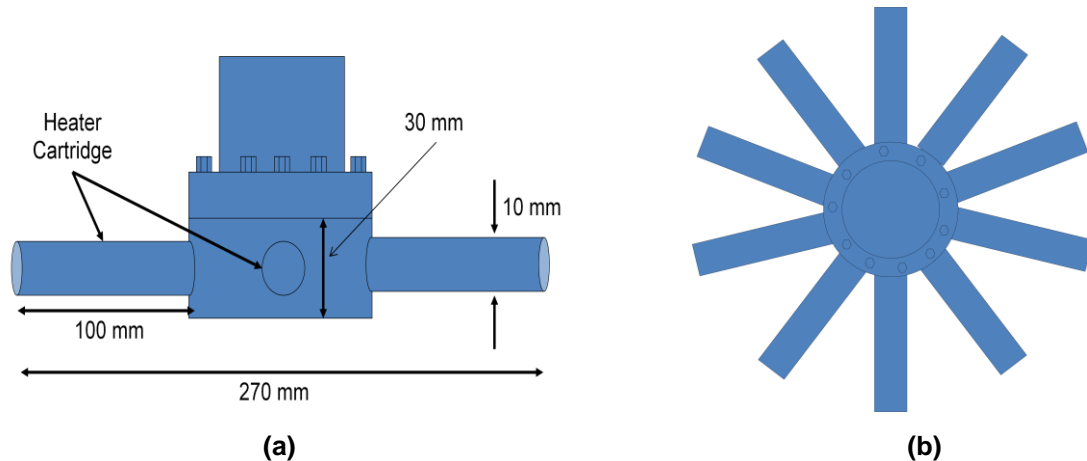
Schematic of cartridge heater assembly (a) Side view and (b) Plan view.
